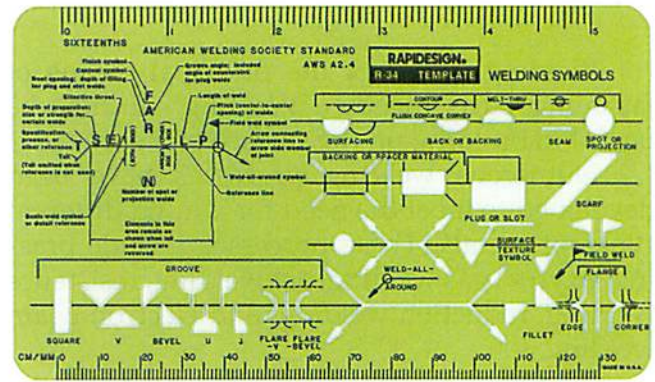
Templates speed the application of welding symbols to drawings in manual drafting. (Alvin & Co.)
